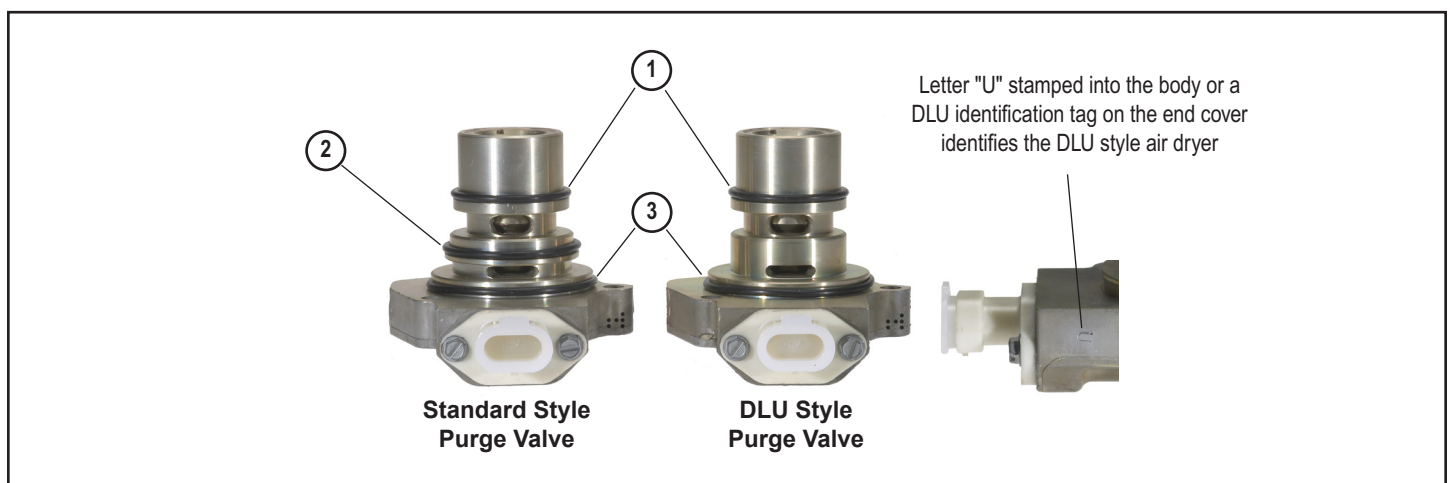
Identifying the Bendix® AD-9® and AD-9® DLU Purge Valve Assembly
